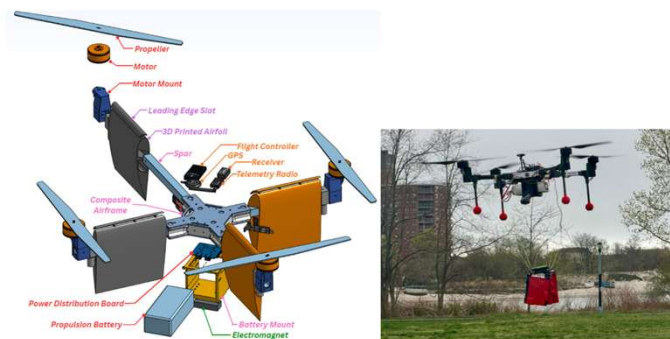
VFS VTOL aircraft (credit: 2025-2026 VTOL Team). (Left) Exploded view of most major components, showing three assembled spar-wing-motor-propellor assemblies and one in exploded view, along with the central composite airframe body. (Right) VTOL flying with payload and legs (not shown in left figure) and with airfoils removed.
